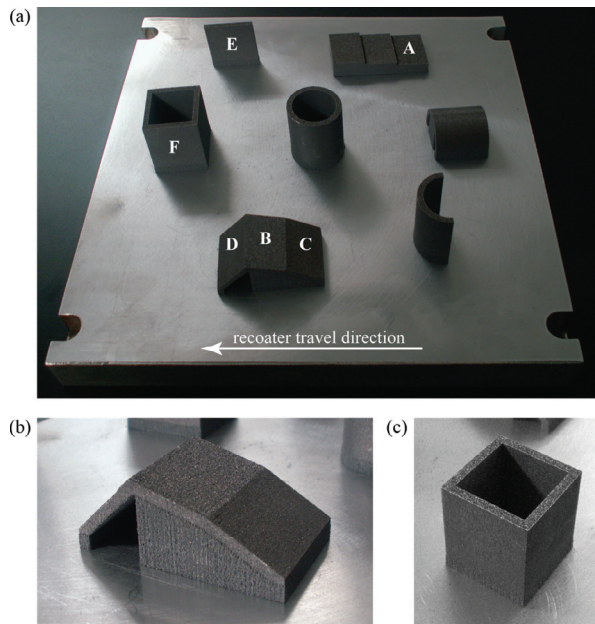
(a) Construction platform with the samples after the heat treatment; (b) detail of specimens B, C and D; (c) detail of specimen F.
